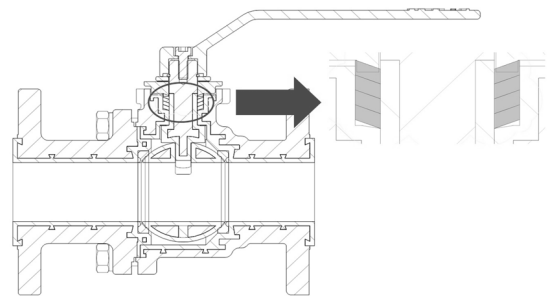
The cross-section of a PFA lined ball valve and a V-shape stem packing
